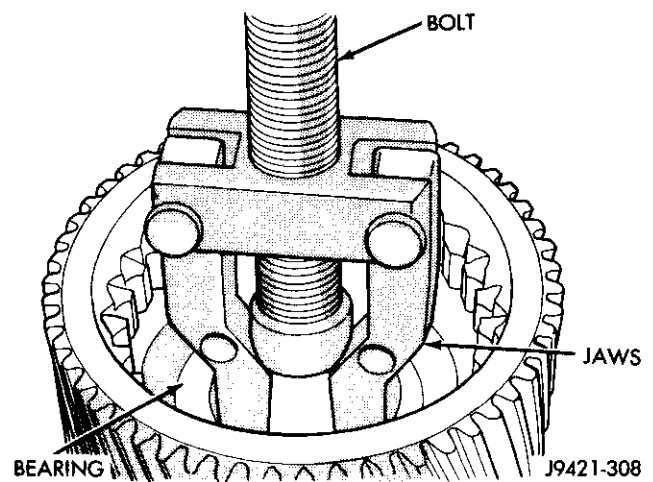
Puller Bolt And Jaws Seated Under Needle Bearing
